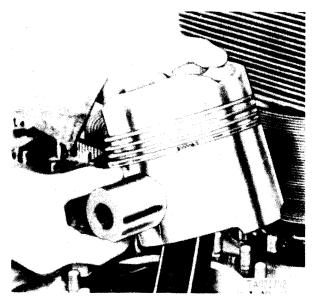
, Removing piston pin and piston ~ cylinder No. 1R.
